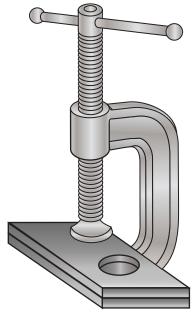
Clamping the plates together before making the plug weld will prevent gapping between the plates.
